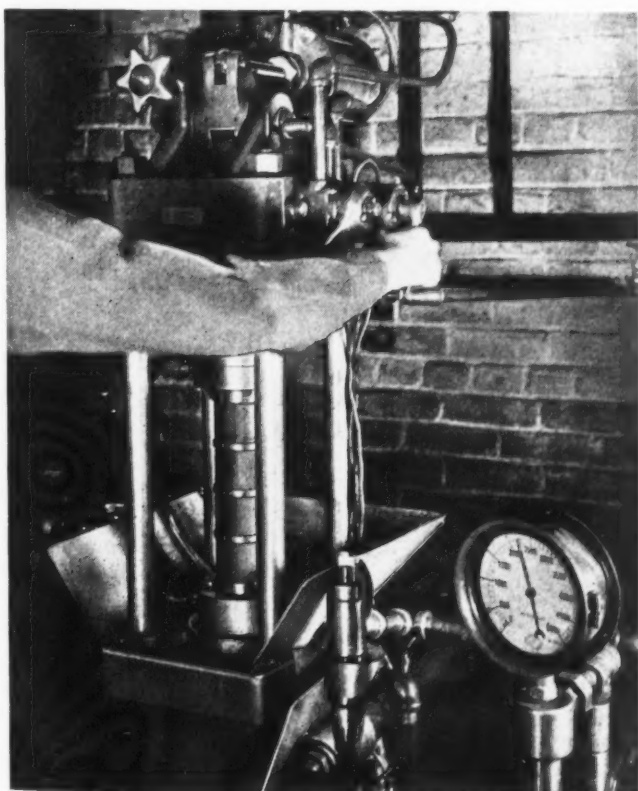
The First Boring Operation on Regular Cast-iron Pump Liners, Performed in a Six-spindle Machine
